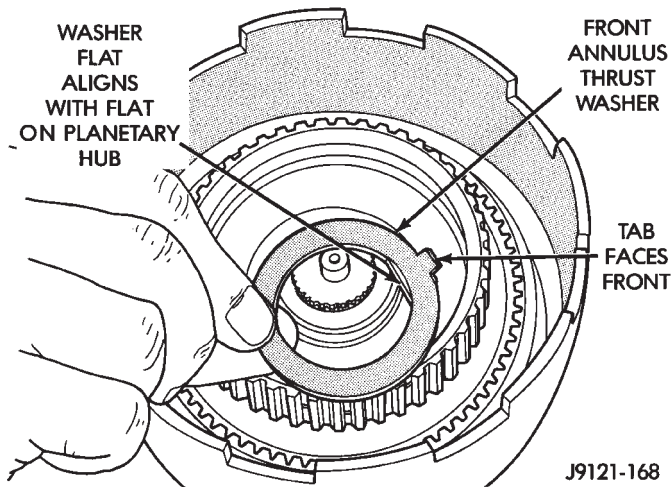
Installing Thrust Plate On Front Annulus Support (42RH)
